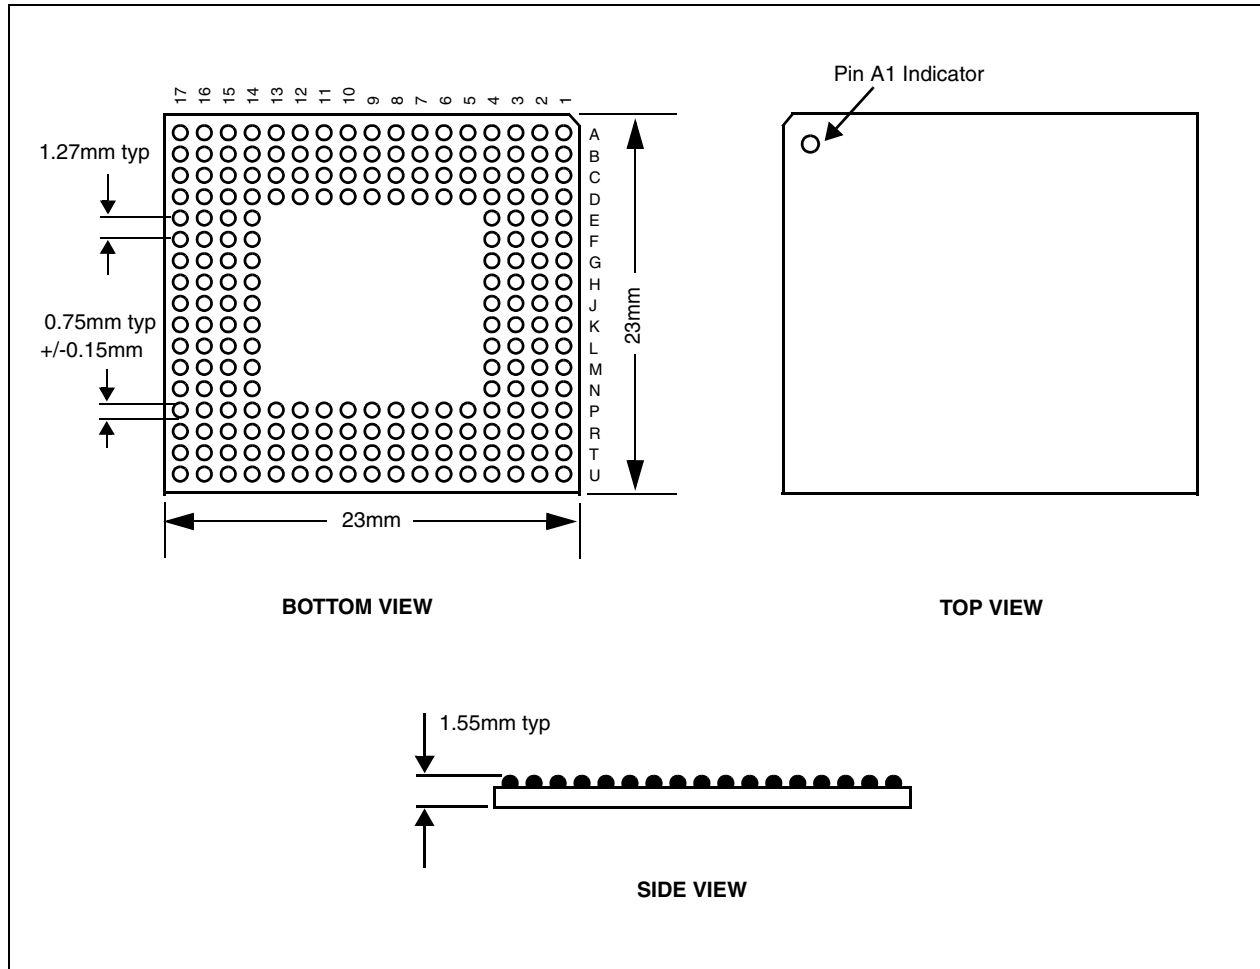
Package Drawing for 208-Pin TBGA (TW)
